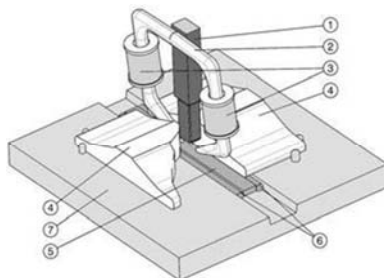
Schematic of experimental setup. 1... welding torch 2... magnetic yoke 3... coils 4... rail foot samples 5... steel strip for weld pool backing 6... ceramic tube for backing laterally penetrating weld metal 7... support plate.
